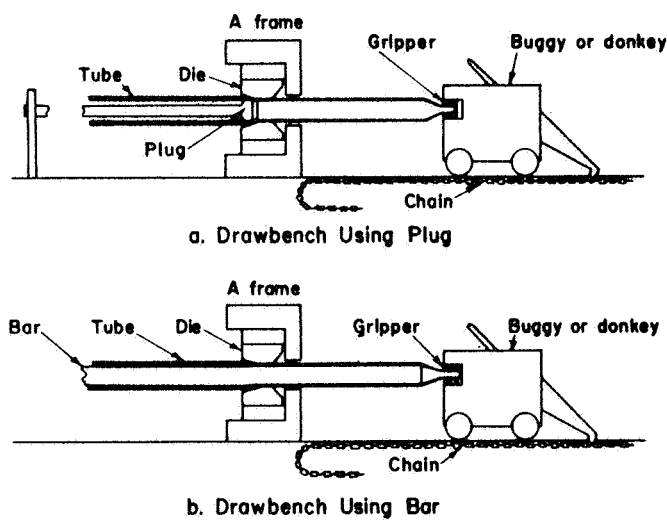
SCHEMATIC DRAWING OF TUBE DRAWBENCH (REF. 30)
